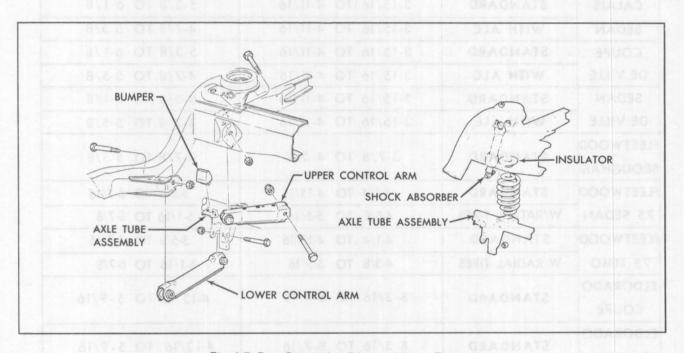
Rear Suspension Disassembled - Eldorado
